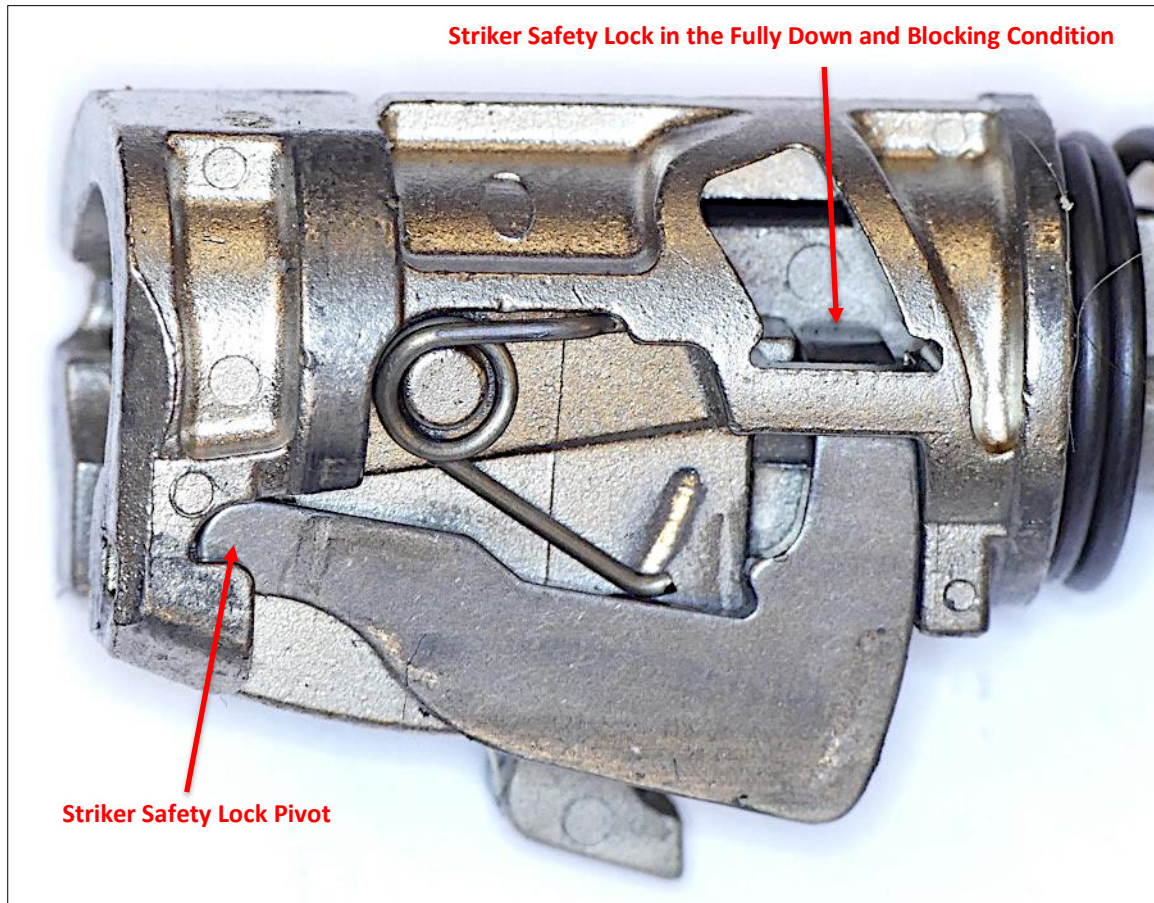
The Subject Striker Assembly in the Full Blocked Condition
